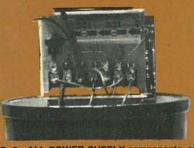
ALL POWER-SUPPLY components, except T1, are mounted on a terminal strip that is epoxied to the bracket.
